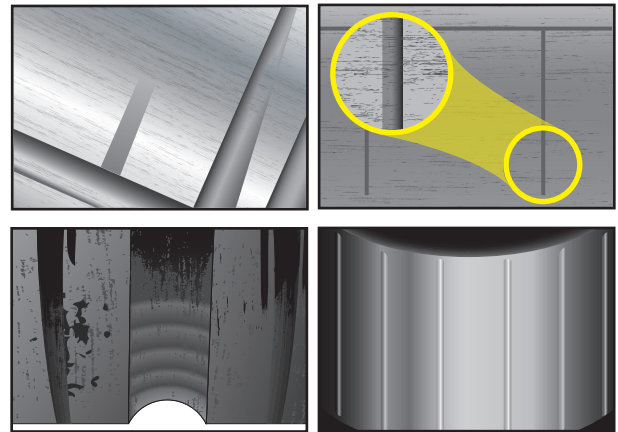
Brinelling is caused by excessive impact. It appears as indentations in the bearing cup raceways. Any static overload or severe impact can cause true brinelling, which leads to vibration and premature bearing failure.
